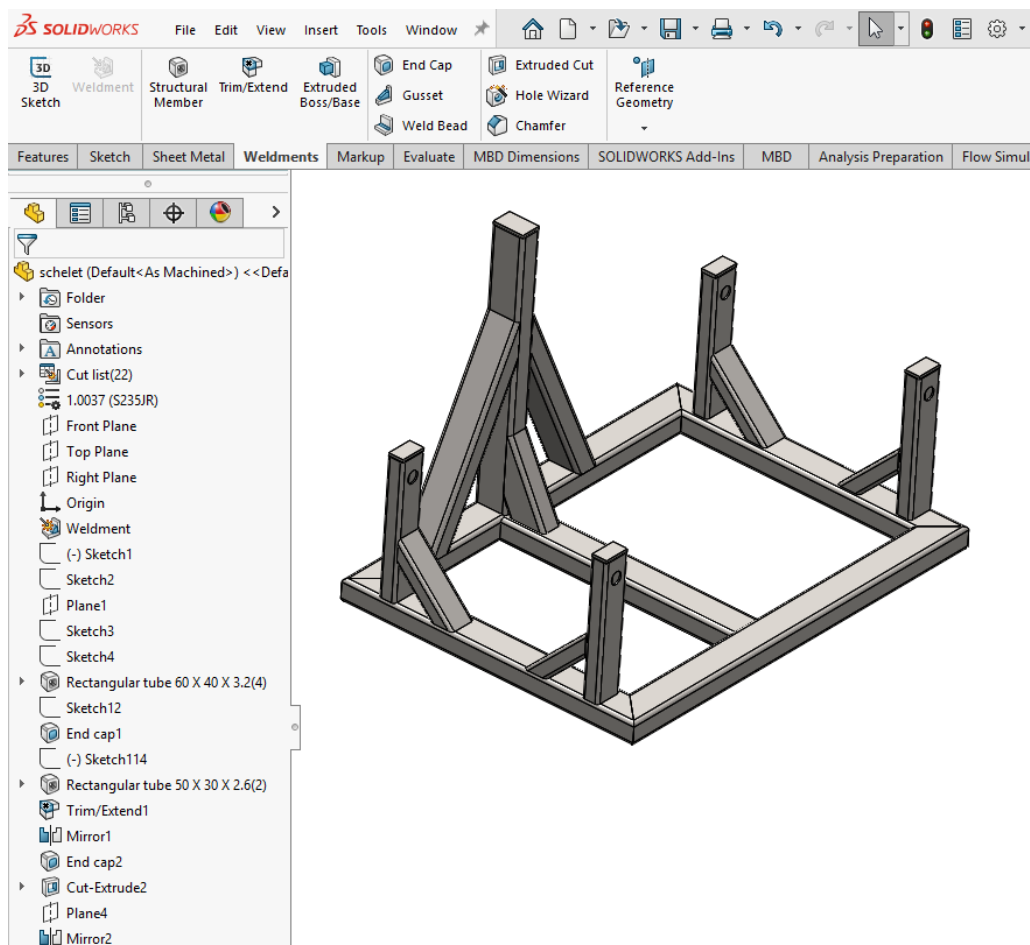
Welded Structure Example in SolidWorks
